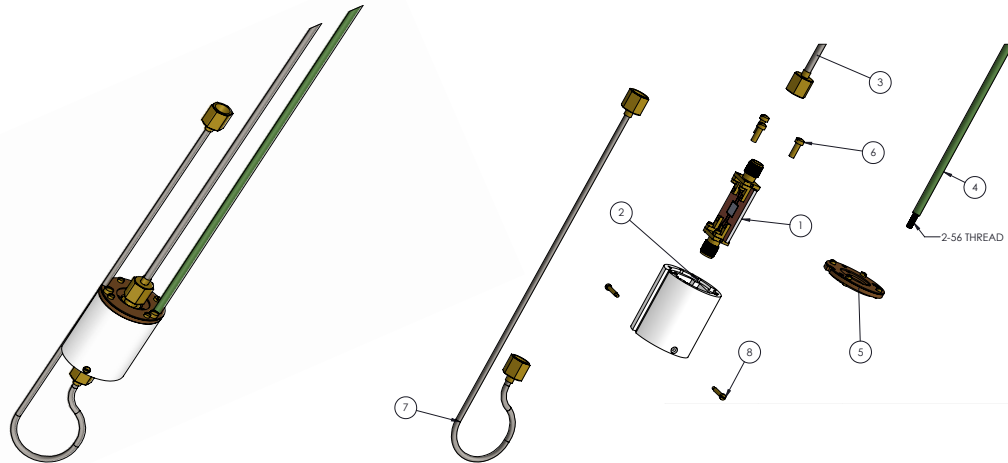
CAD drawing ESR probe, assembled and exploded views. The CBH holds CB. The top SMA connector on CB passes through the gear mechanism, which controls CB's rotation about the bottom pivot pins. The green G10 rod extends from the gear mechanism through the probe top plate, allowing manipulation of the mechanism *in situ*. The semi-rigid coaxial cables pictured also extend through the top plate. ① CB; ② CBH; ③ & ⑦ non-magnetic, semi-rigid copper coaxial cable (Tek-Stock, UT-085C-LL); ④ threaded G10 control rod (.125" diameter, 2-56 thread on last .25"); ⑤ gear mechanism; ⑥ 2-56 x .25" brass screw to affix the gear mechanism to the CB holder; ⑧ a pivot screw to constrain the motion of CB within CBH.
